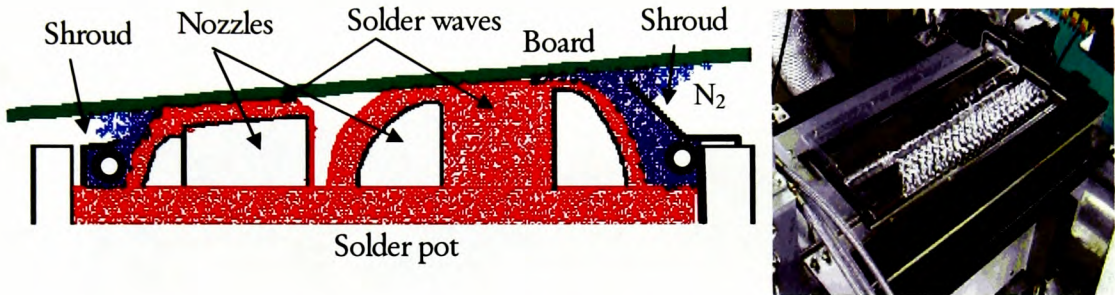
Schematic and Real View of Wave Soldering Bath Section
